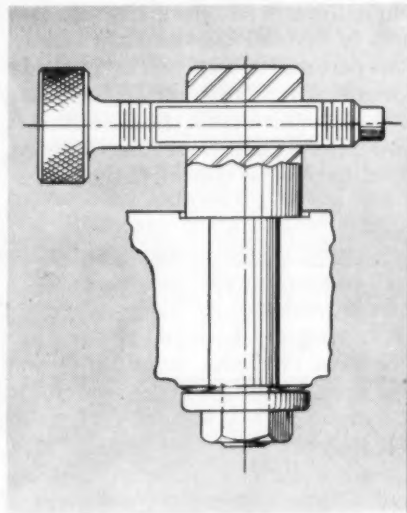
Clamping arrangement in which swinging member is firmly retained in the pivot hole by means of a nut and washer.
